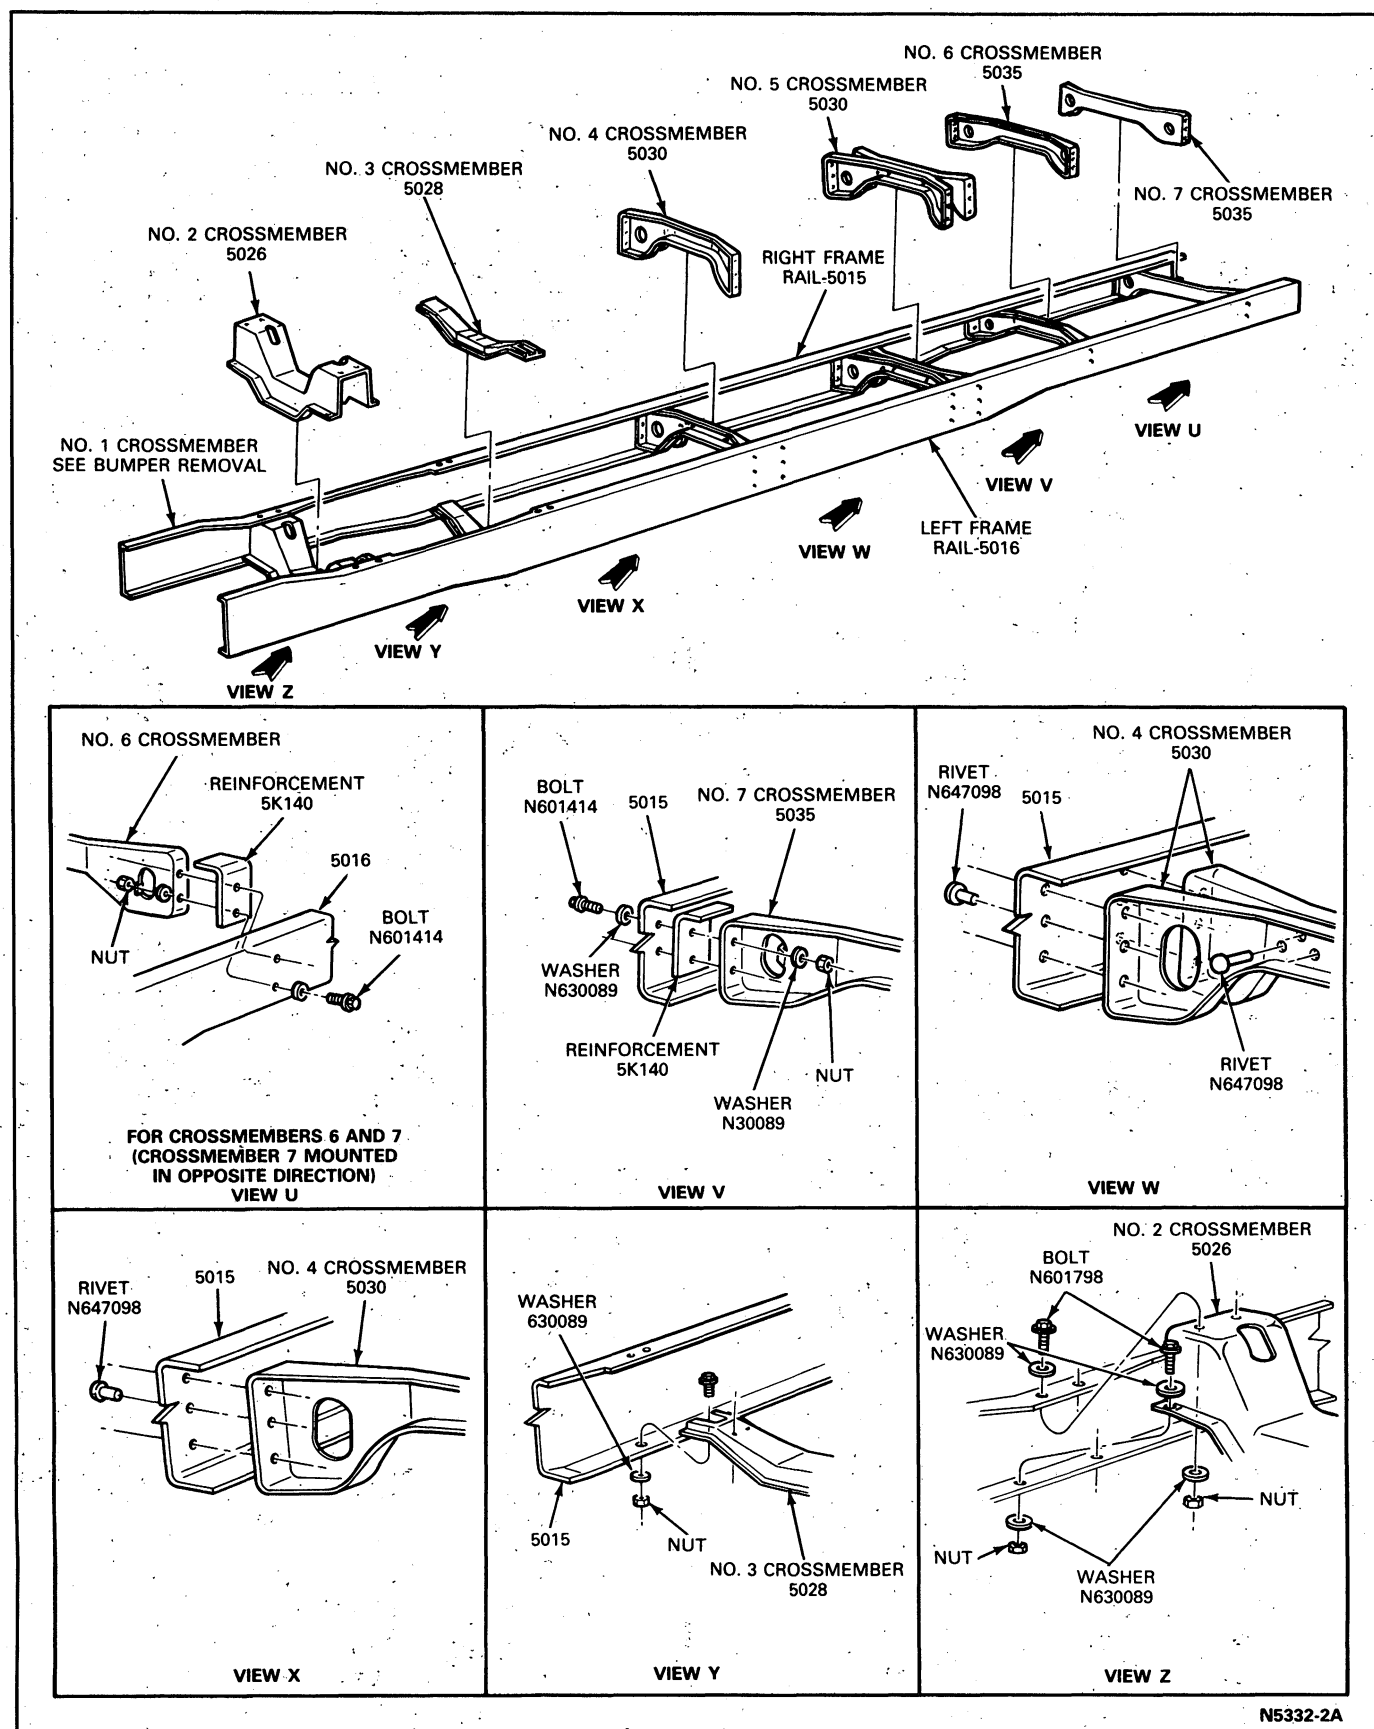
Frame and Crossmember Installation—F-Super Duty Commercial Stripped Chassis (158 inch)
